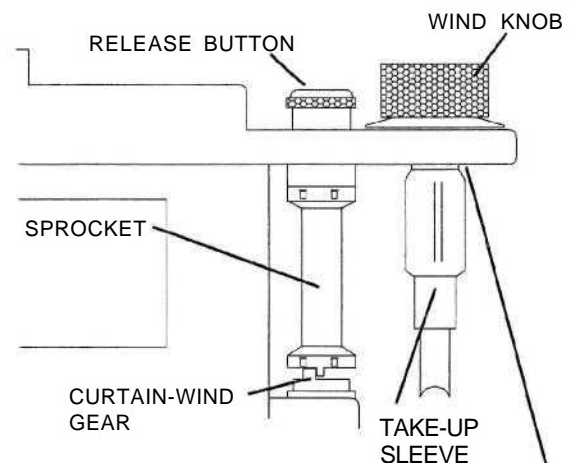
BACK OF CAMERA, BODY SHELL REMOVED
